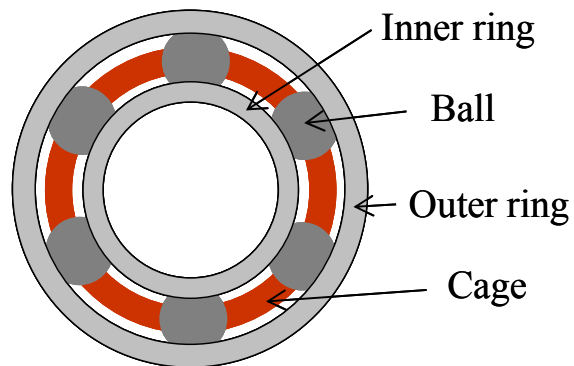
Ball Bearing Elements: Balls, Inner and Outer Races, and Cage
